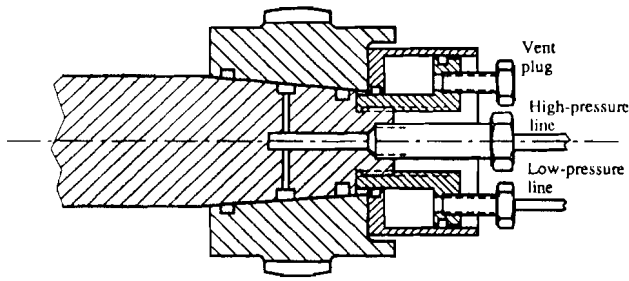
Installation/Removal Hydraulic Tool. Note: This tool allows for heat-less installation, and for safe removal.
